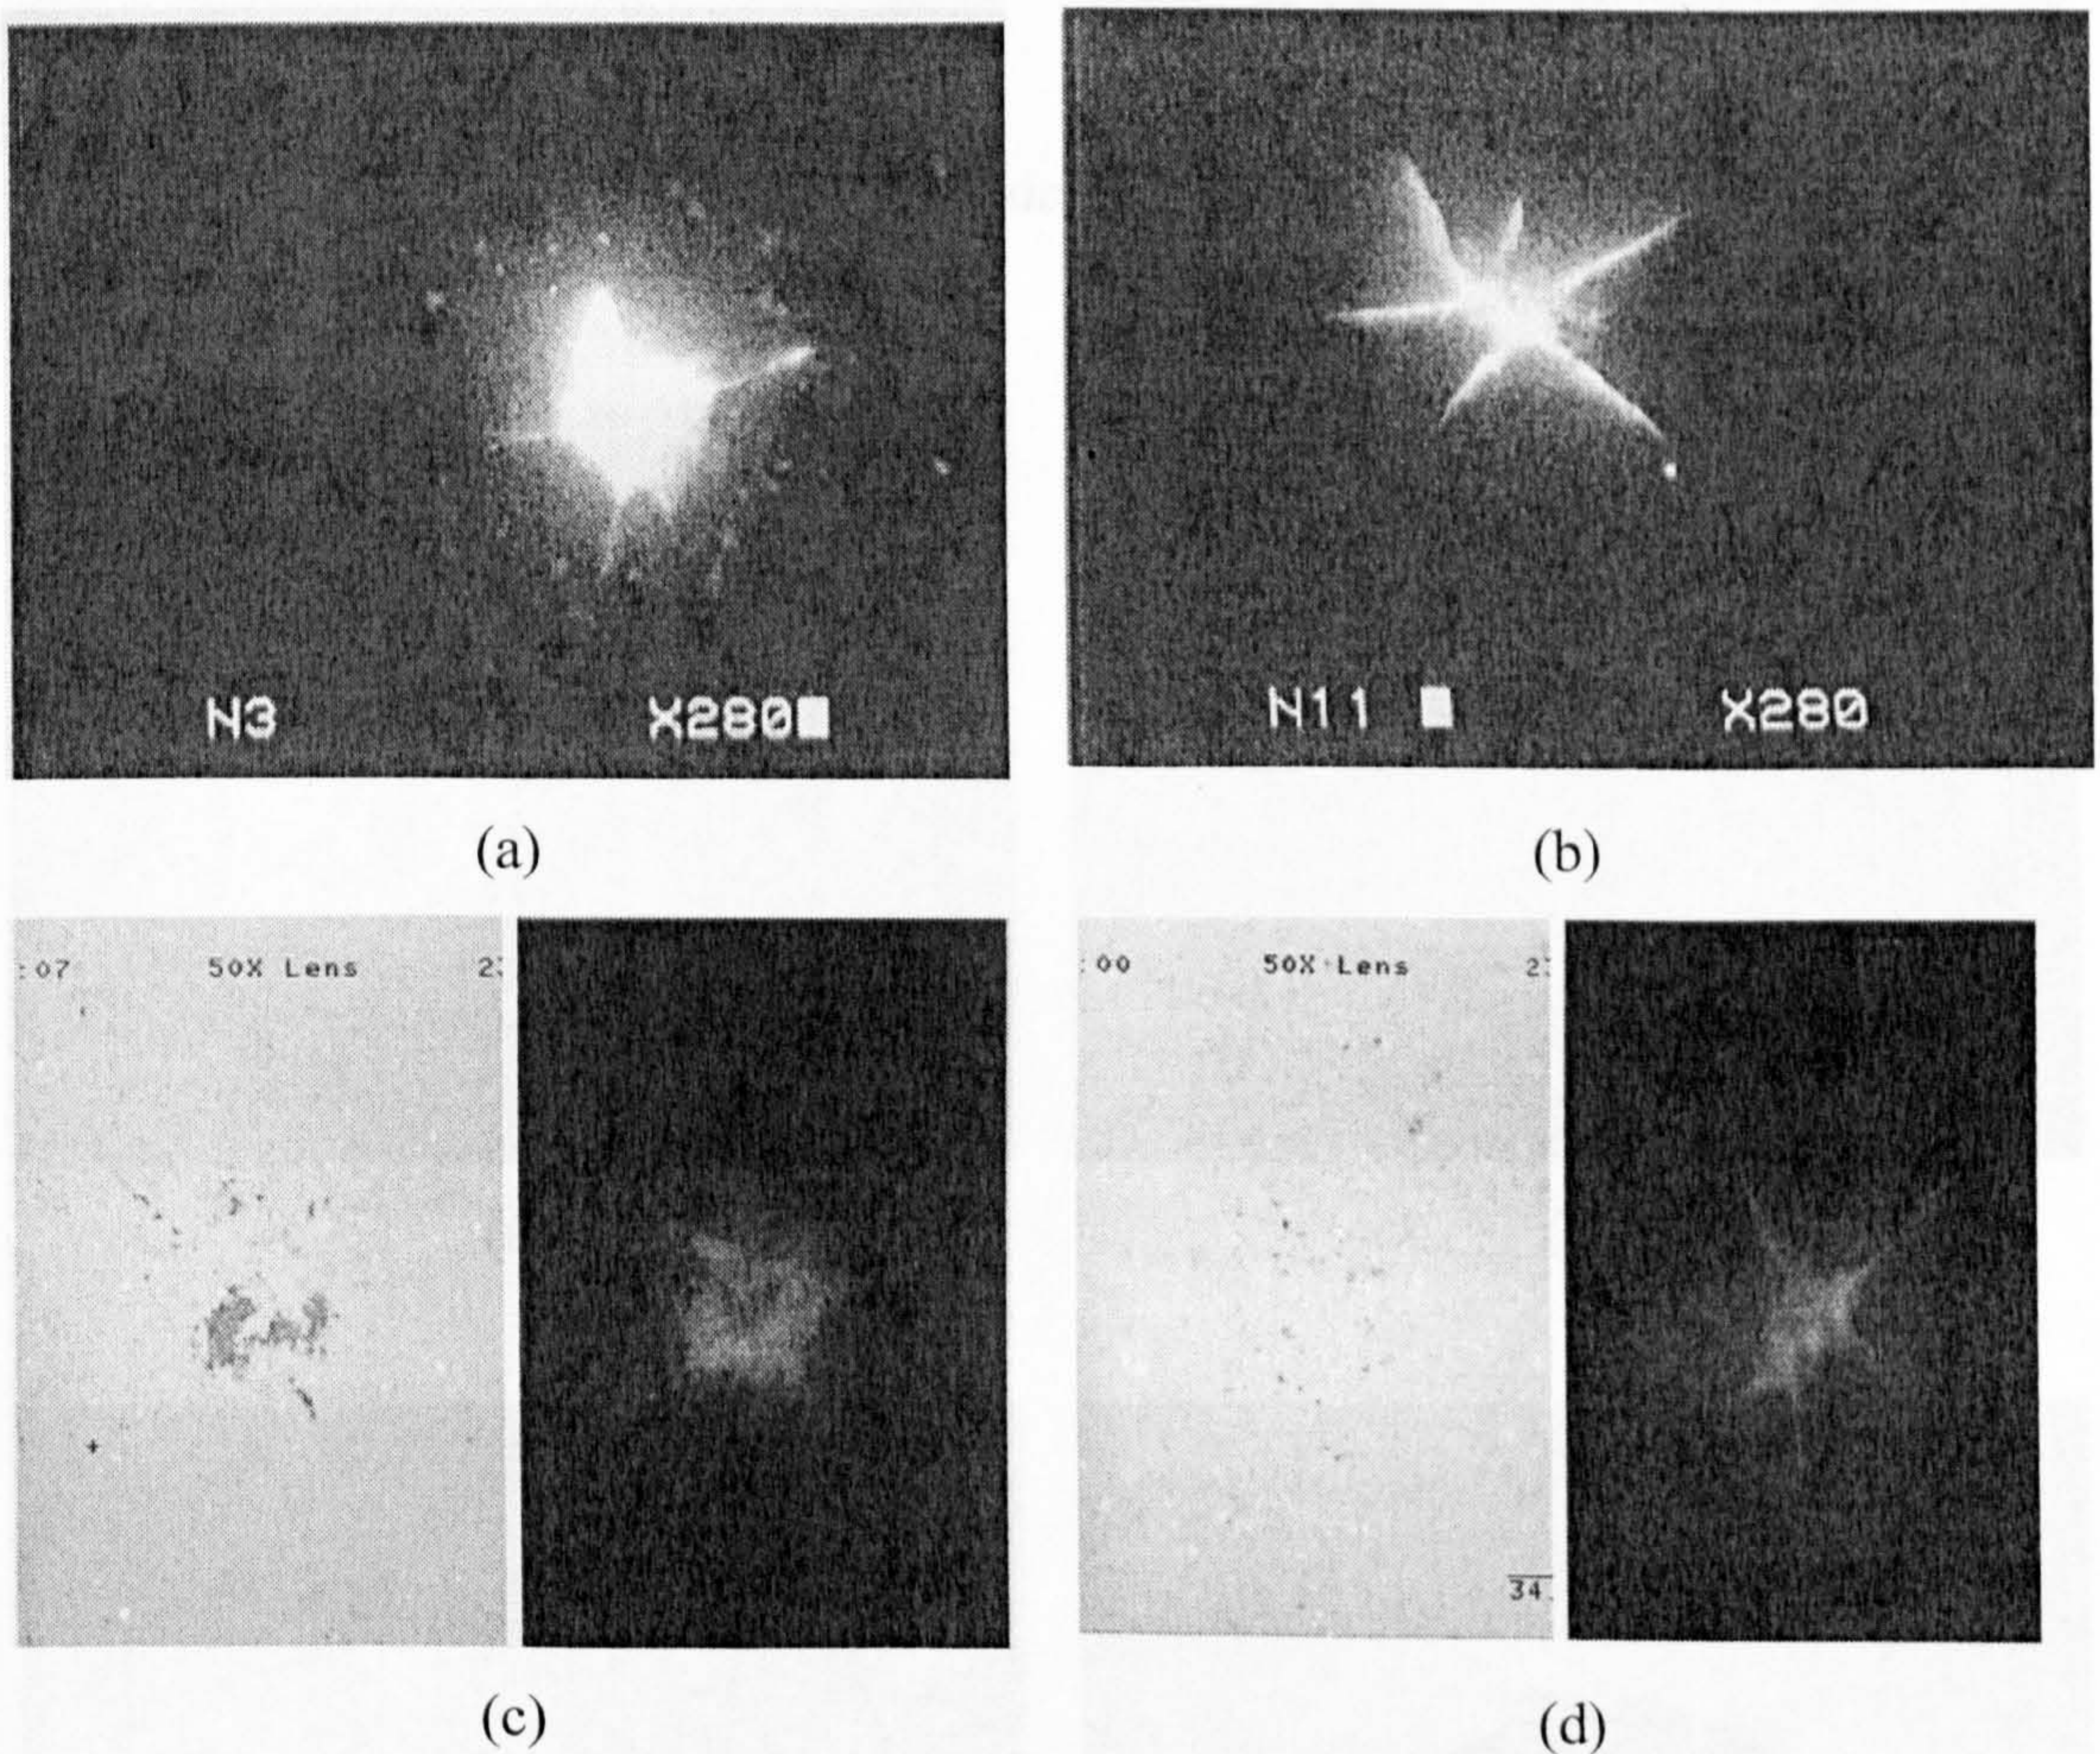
Star defects after dye penetrant under UV light microscopy inspection
